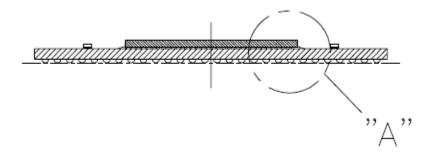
23 x 23 mm 6L 0.7mm 813 Ball FCBGA Package Drawing - Section C-C
